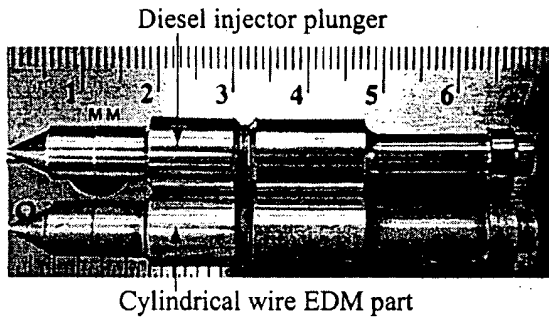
A cylindrical wire EDM part with the same shape as the diesel engine injector plunger
